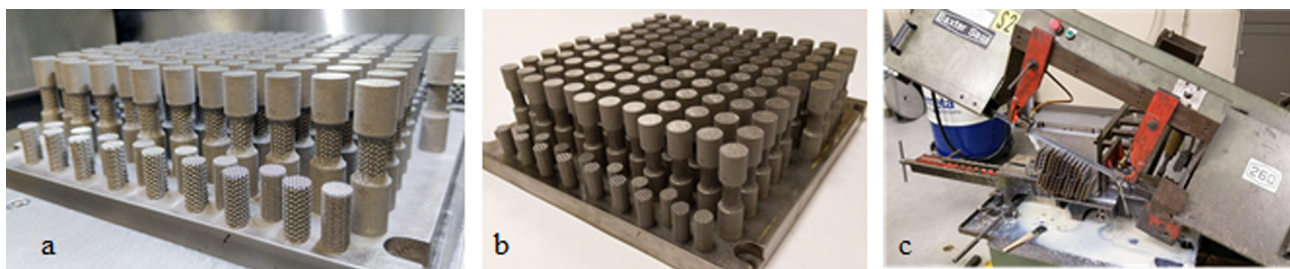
Specimens on the build plate after (a) manufacturing and (b) removal from machine; (c) specimens separation from the build plate.
